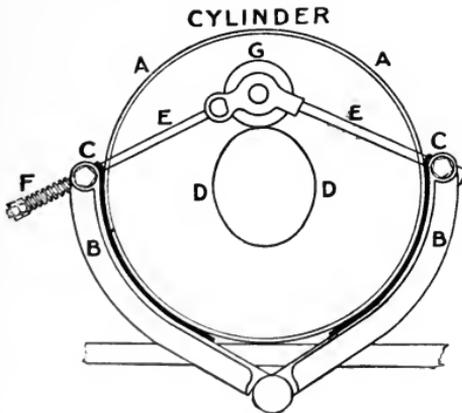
SHOWING BRAKE USED ON MANN'S MACHINE.
